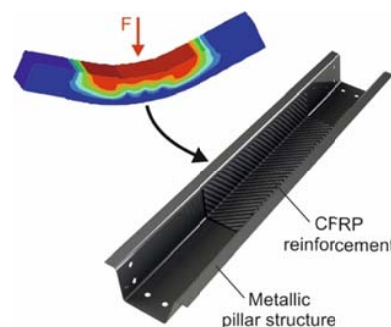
Tailored hybrid pillar structure consisting of sheet metal and local CFRP reinforcement
